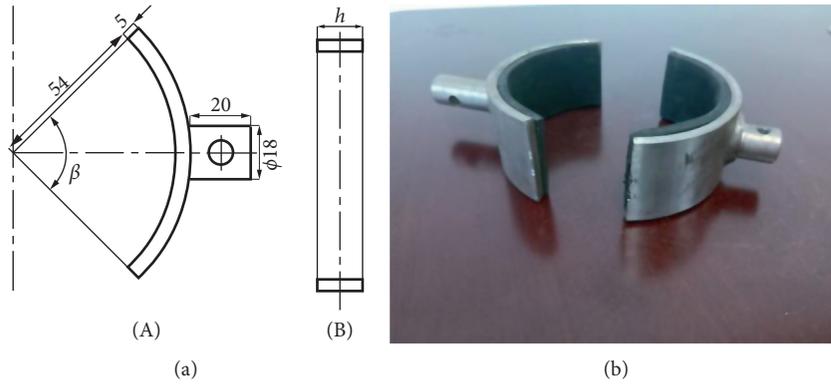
Clamping parts. (a) Structure of clamping elements. (A) Front view. (B) Side view. (b) A set of clamping elements.
